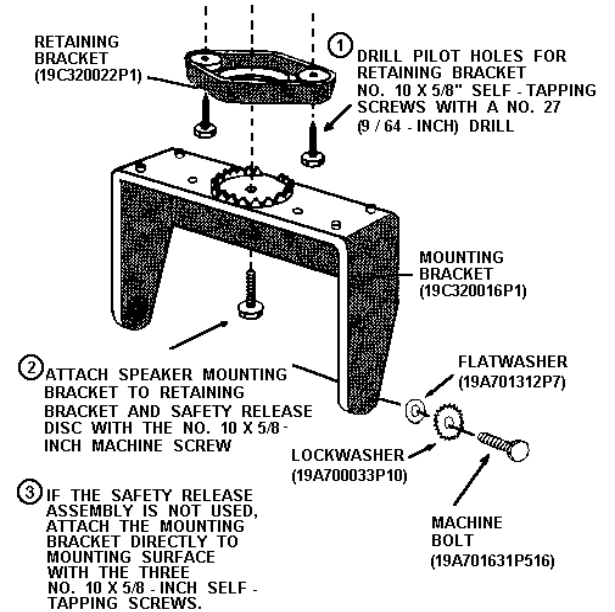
MOUNTING THE STANDARD SPEAKER
